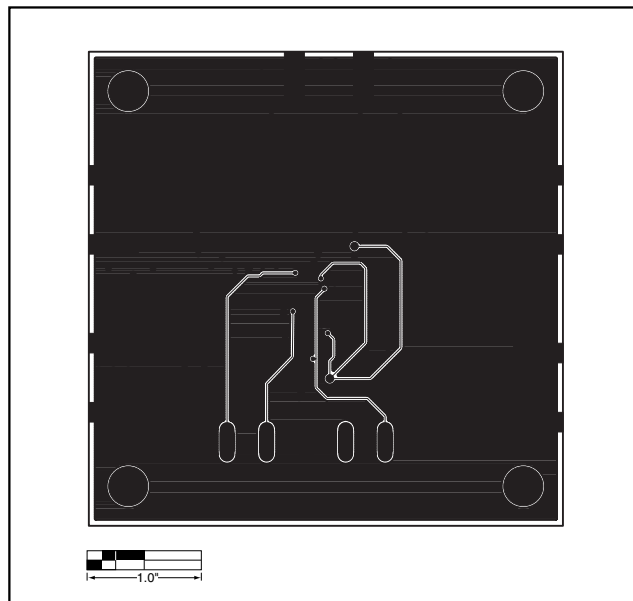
MAX2383 EV Kit PC Board Layout—Back Side
